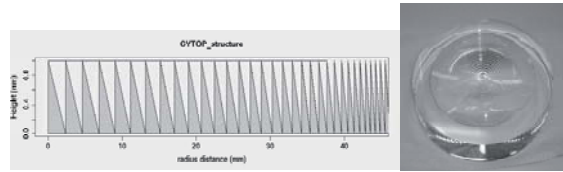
Fresnel Profile Chart after machining a work piece after machining
